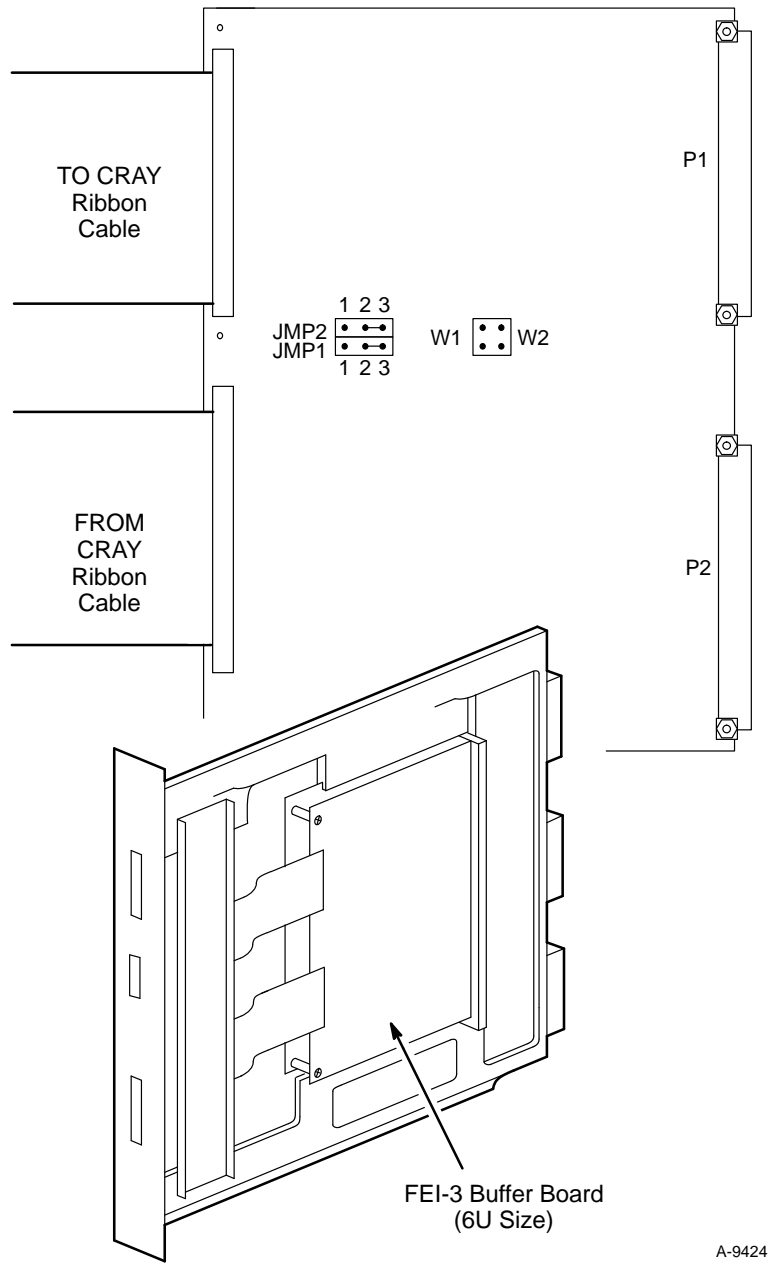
FEI-3 Buffer Board Jumper Configuration
